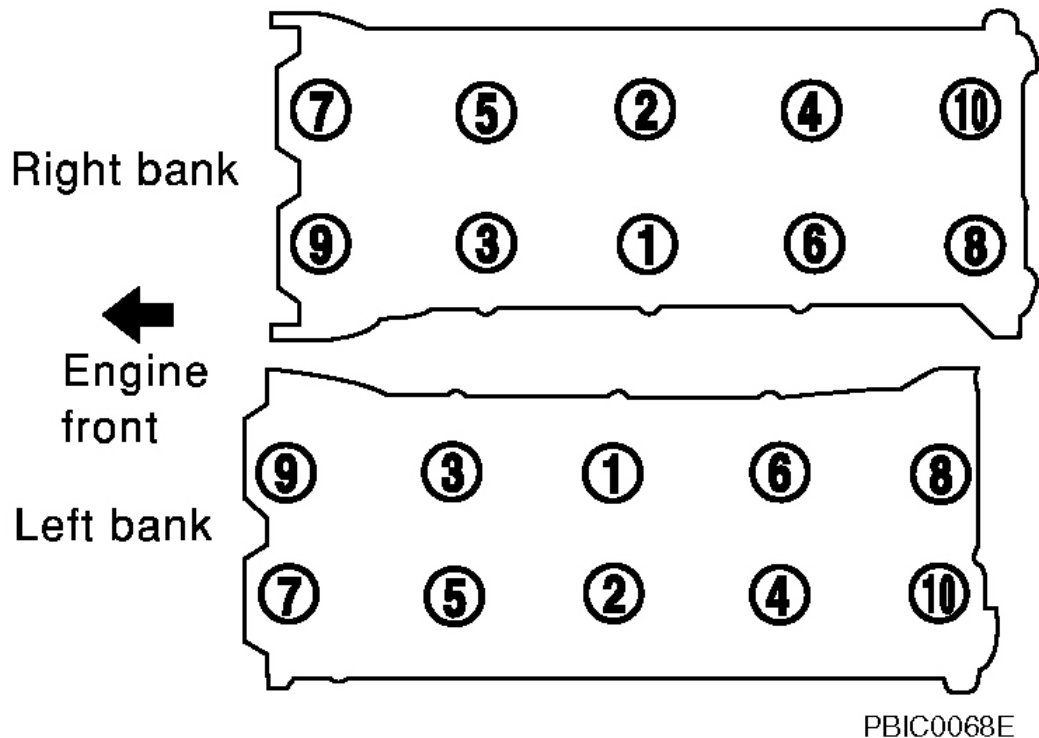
Identifying Cylinder Head Bolts To Remove Cylinder Heads In Sequence
